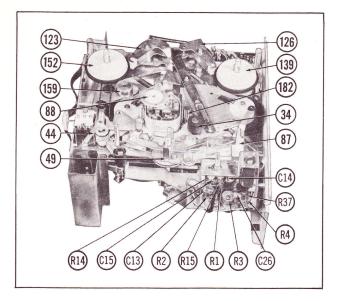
Top View of Recorder Removed From Case — Plastic Top and Top Plate Assembly (14) Removed.
